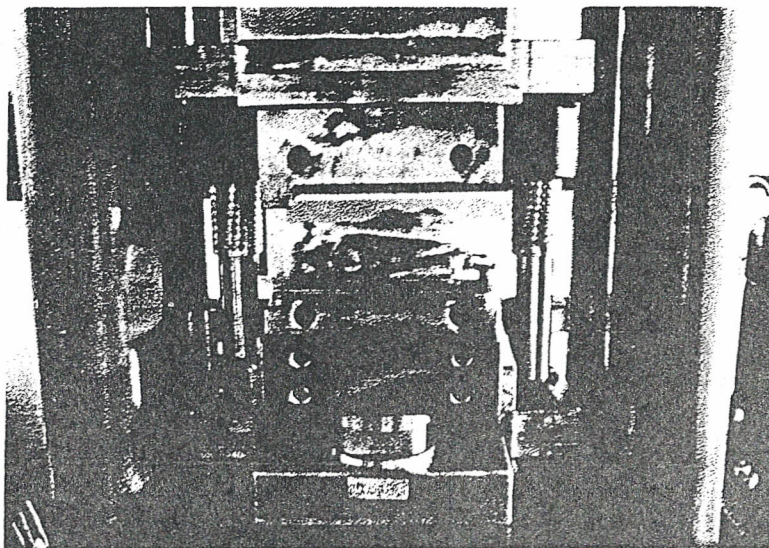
The lab press equipped to evaluate the tool-loading system.
